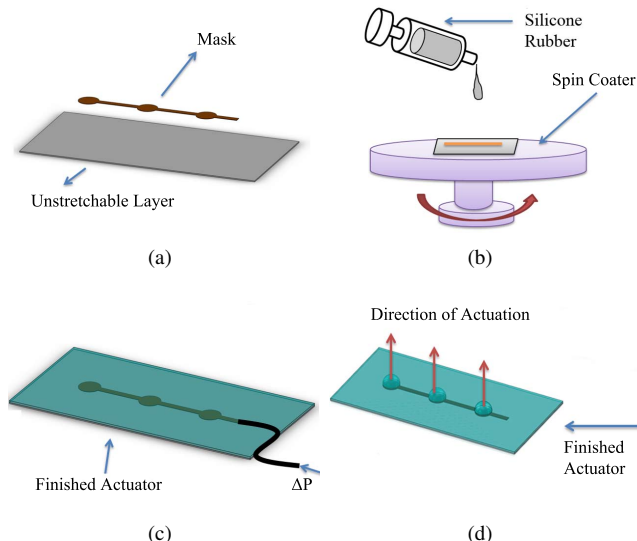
Fabrication process for a single-sided SPA-skin. A mask is put on an unstretchable layer (a), the silicone is spun on the unstretchable layer to obtain a thin cover layer on a rotating spin coater (b), an air-tube is connected with the finished actuator (c), synopsis of the behavior of the SPA-skin (d).
